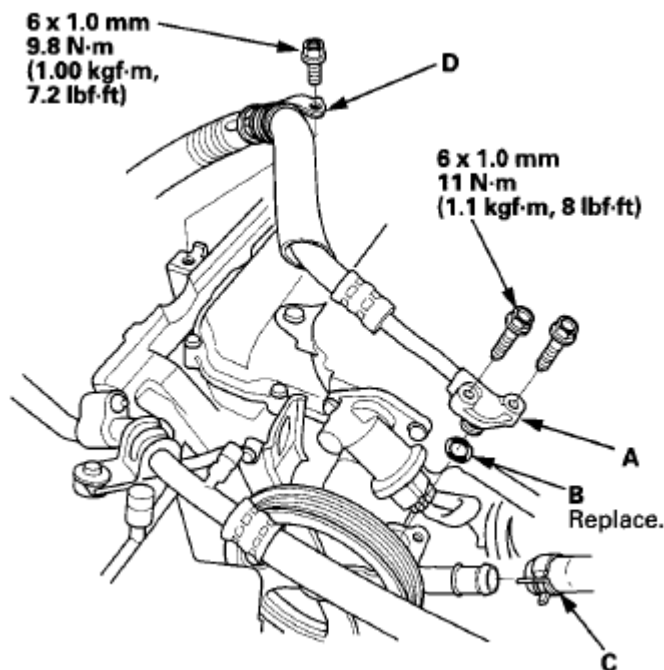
Connecting Pump Outlet Hose With New O-Ring And Pump Inlet Hose To Power Steering Pump With Torque Specifications
